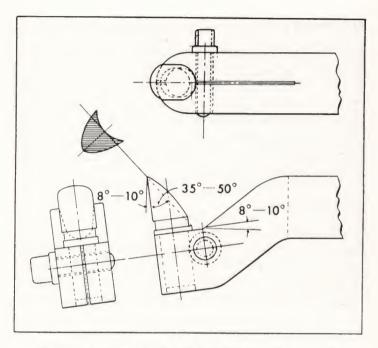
Lathe tool with bit that is easily ground to the proper shape.
